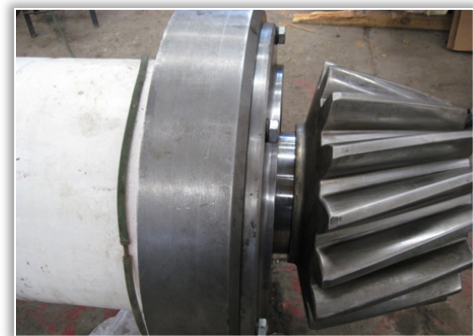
Replacement of Sliding Bearings and Bronze Bushings
